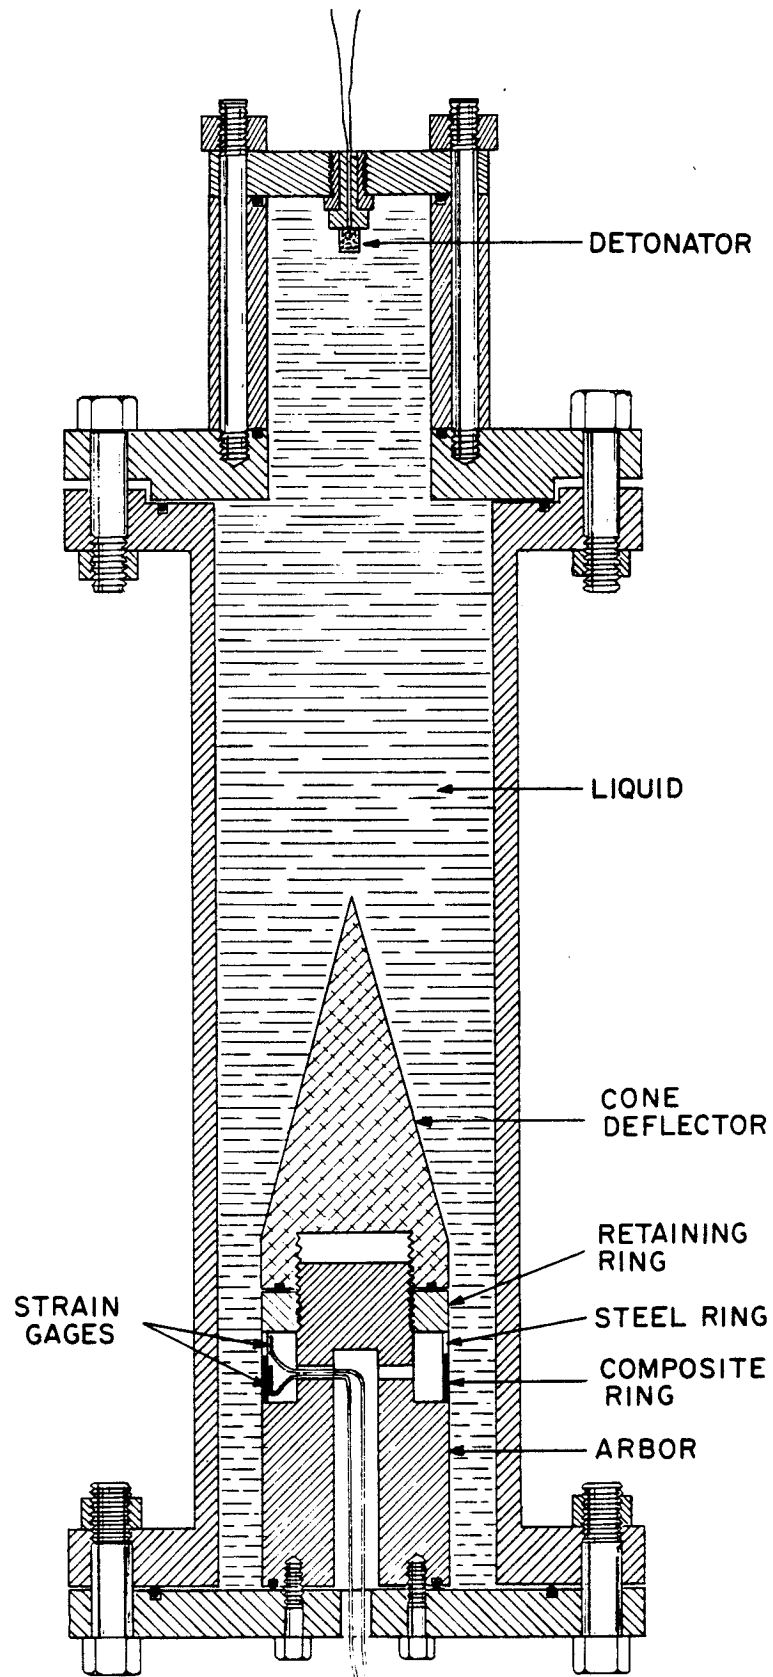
Fixture for dynamic compressive loading of composite ring specimens.
